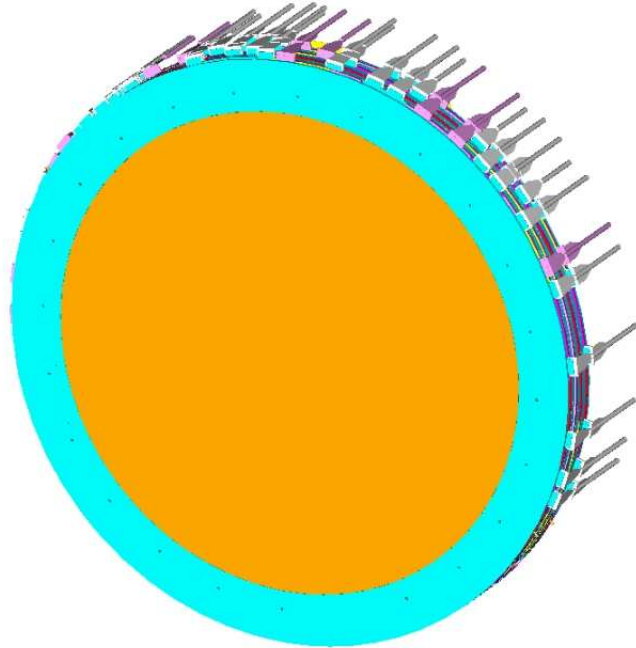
Three-dimensional CAD model of a single FDC package showing the positions and spacing of the readout cables on the package perimeter. The outer diameter of each package is 120 cm and the active area diameter of each package is 100 cm .
